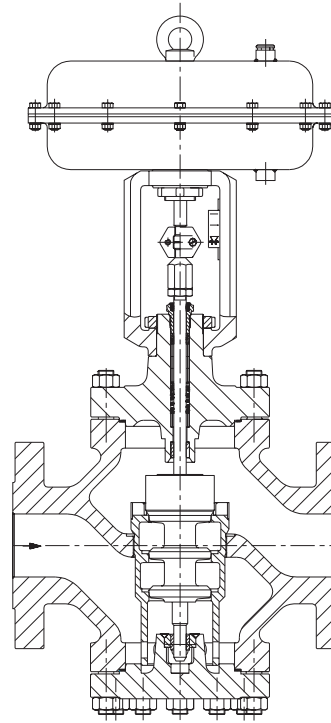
· Type 3255 Globe Valve with 3-Stage Axial Plug
